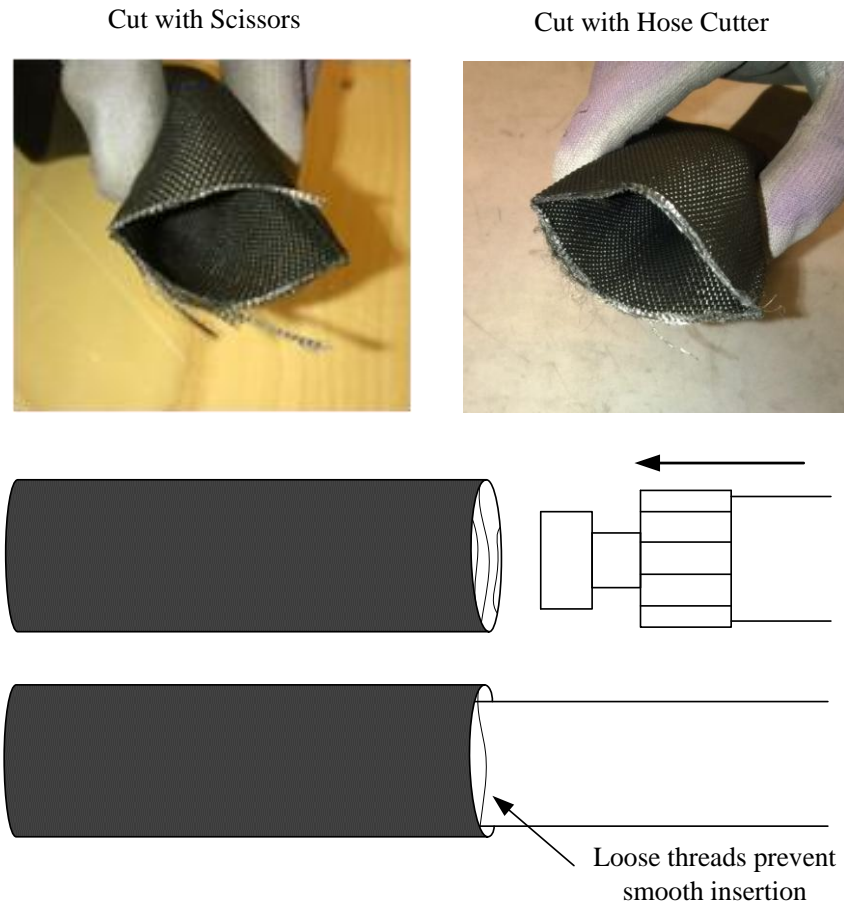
Preparing sleeve pieces with manual hose cutting machine.
